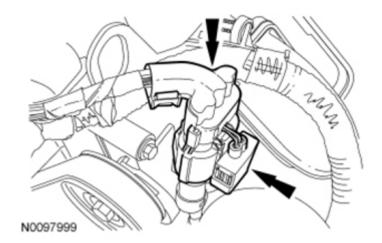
Locating High-Voltage Electrical System Wiring Retainers Courtesy of FORD MOTOR CO.
